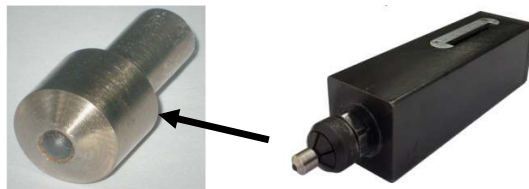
The diamond burnisher with tool holder and working parts (spherical caps).
